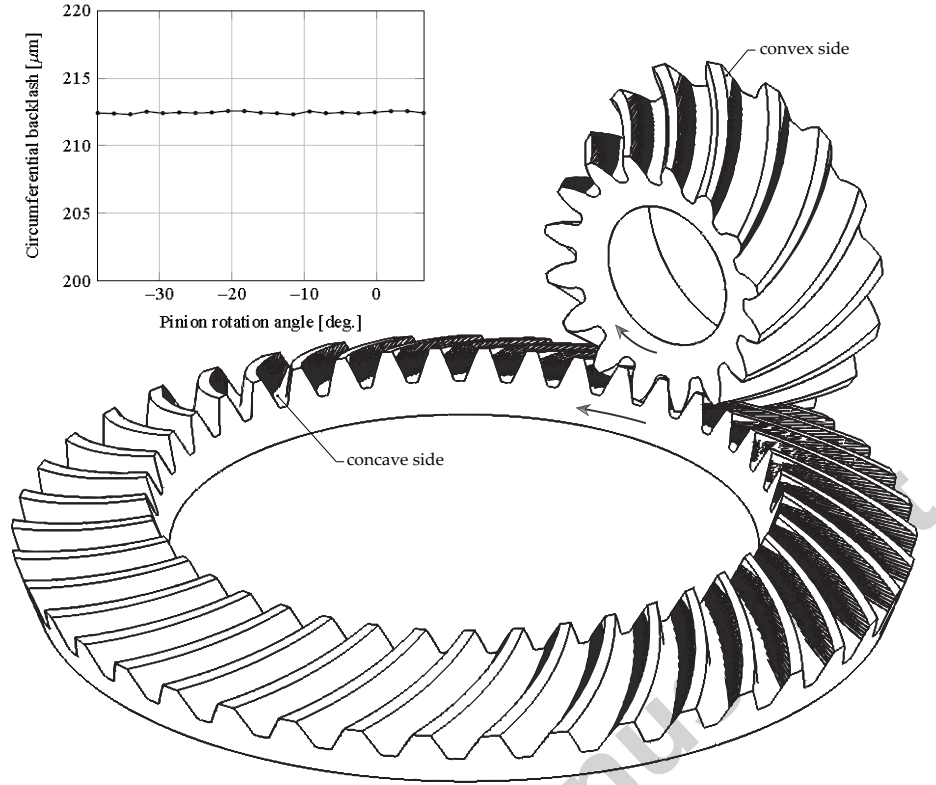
Contact pattern on the convex sides of the pinion tooth surfaces and the concave sides of the gear tooth surfaces and evolution of circumferential backlash.
